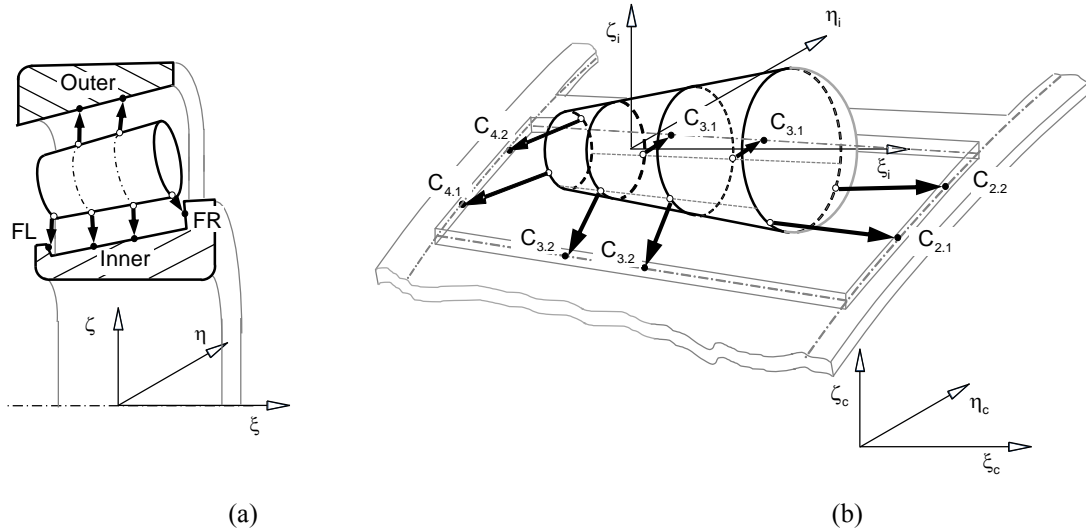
Contacts considered on the roller bearing. (a) Contacts on roller with raceways and flanges; (b) Contacts between roller and cage.
